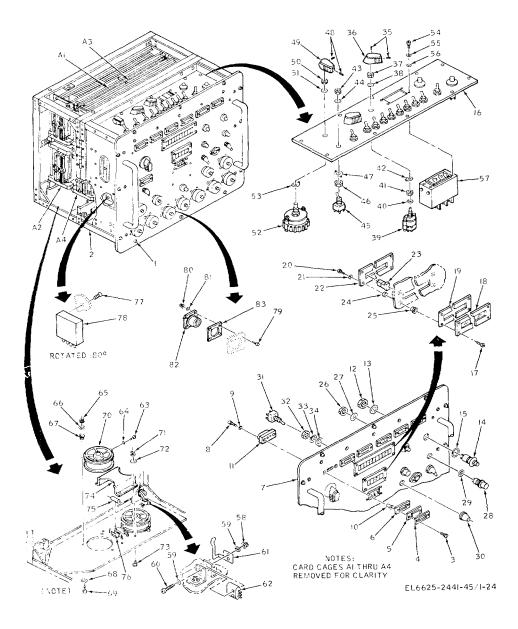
Logic Control Unit TS-2912/ASM-386 exploded view
